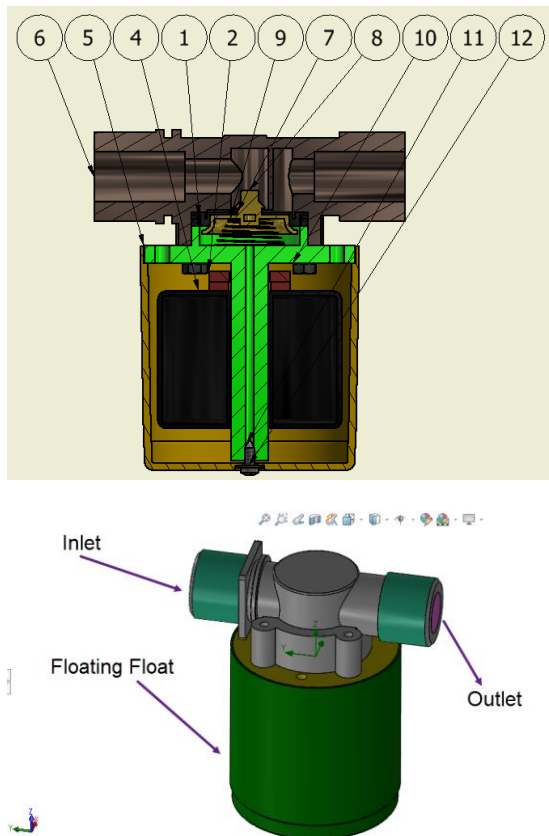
CAD model of the float valve (1. Spring locating shaft; 2. Tightening screw; 3. Shaft; 4. Floating float; 5. Valve seat cap; 6. Water pipe hose; 7. Plastic base plate rising hard; 8. Flow guide bolt; 9. Taper spring; 10. Screw; 11. Screw; 12. Washer)
